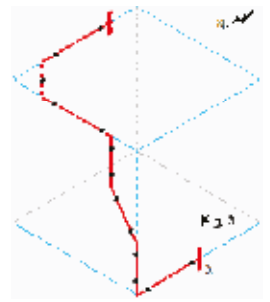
2.12 shows a pipe spool that runs through three planes. There is a bow (rolling) in one plane 45° towards West.
